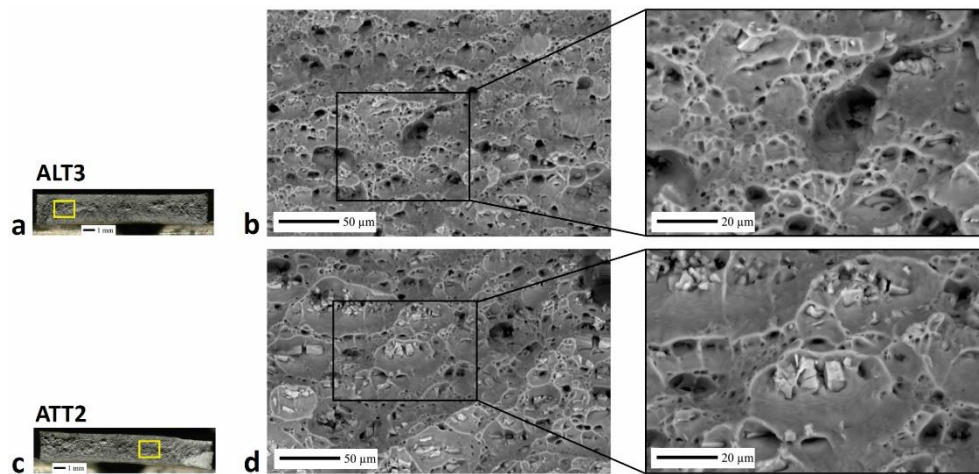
Fracture surface of the tensile testing - macro-optical picture and SEM pictures: a) and b) Specimen ALT3; c) and d) Specimen ATT2.
